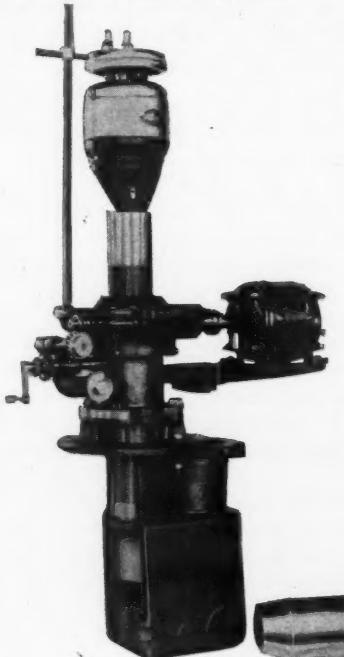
B & B portable cylinder grinder, which is said to do work which compares favorably with that done by large grinding machines. It is adjustable for different-size cylinders and for various cuts
